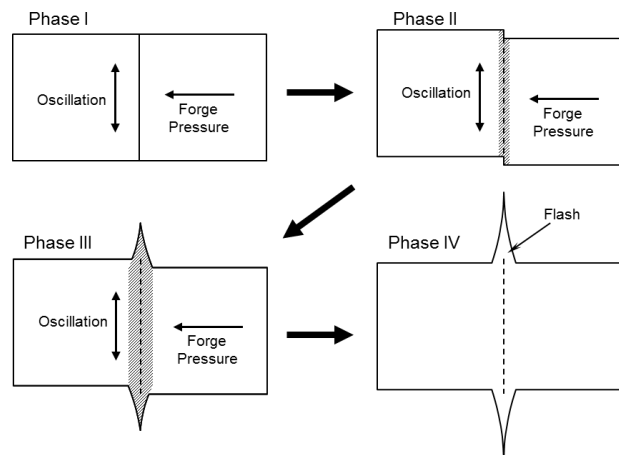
Schematic view of process of linear friction welding (LFW)
